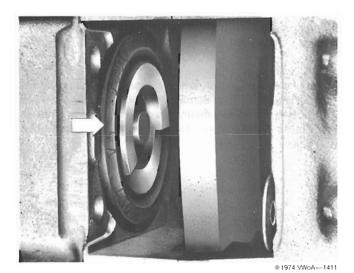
Rubber dust seal that should be checked before installing the pads.
